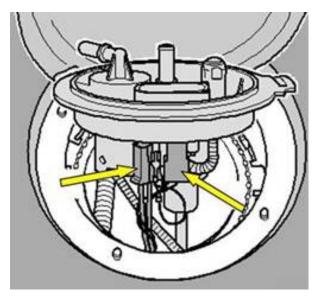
Two electrical connectors on the right locking flange to be disconnected.
